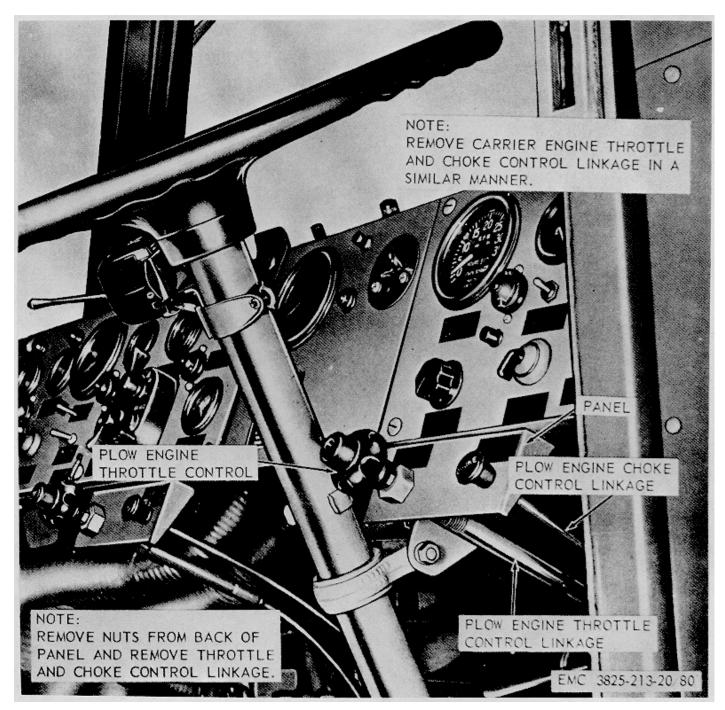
Plow engine throttle control linkage and choke assembly, removal and installation.
